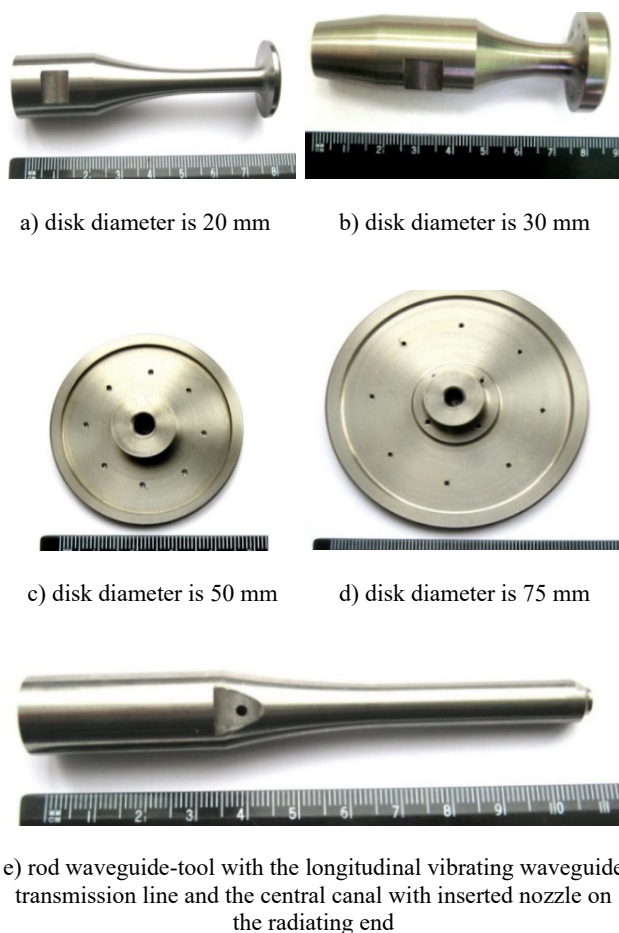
Designed working tools: a, b – rod with the disk ending; c, d – flexural vibrating disk; e – rod with the central channel
